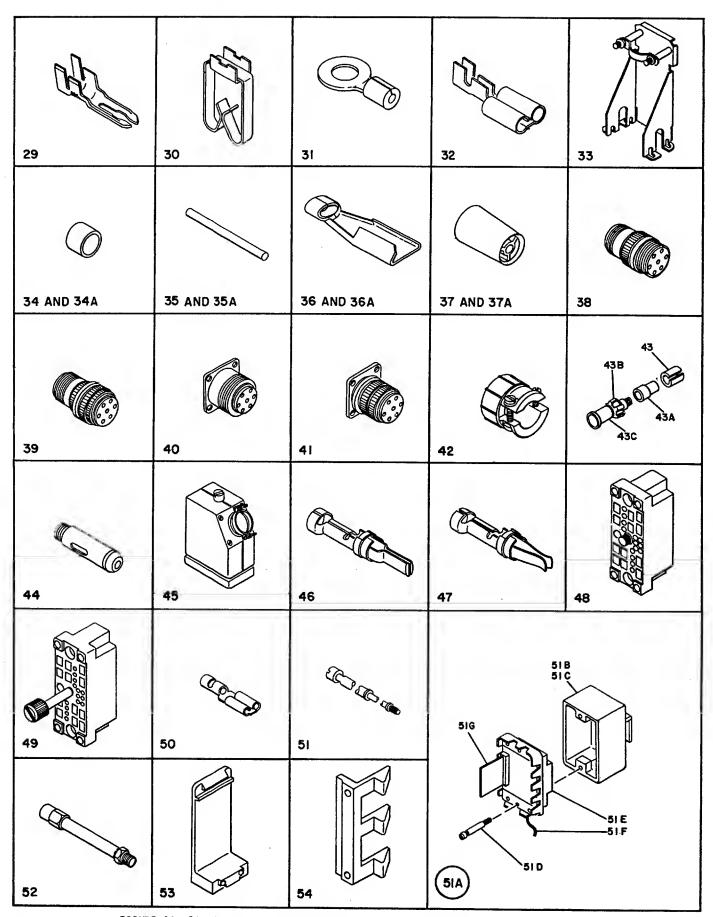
CABLE AND JUMPER ASSEMBLY COMPONENT PARTS. SHEET 2 OF 3. SEE LIST 19.
